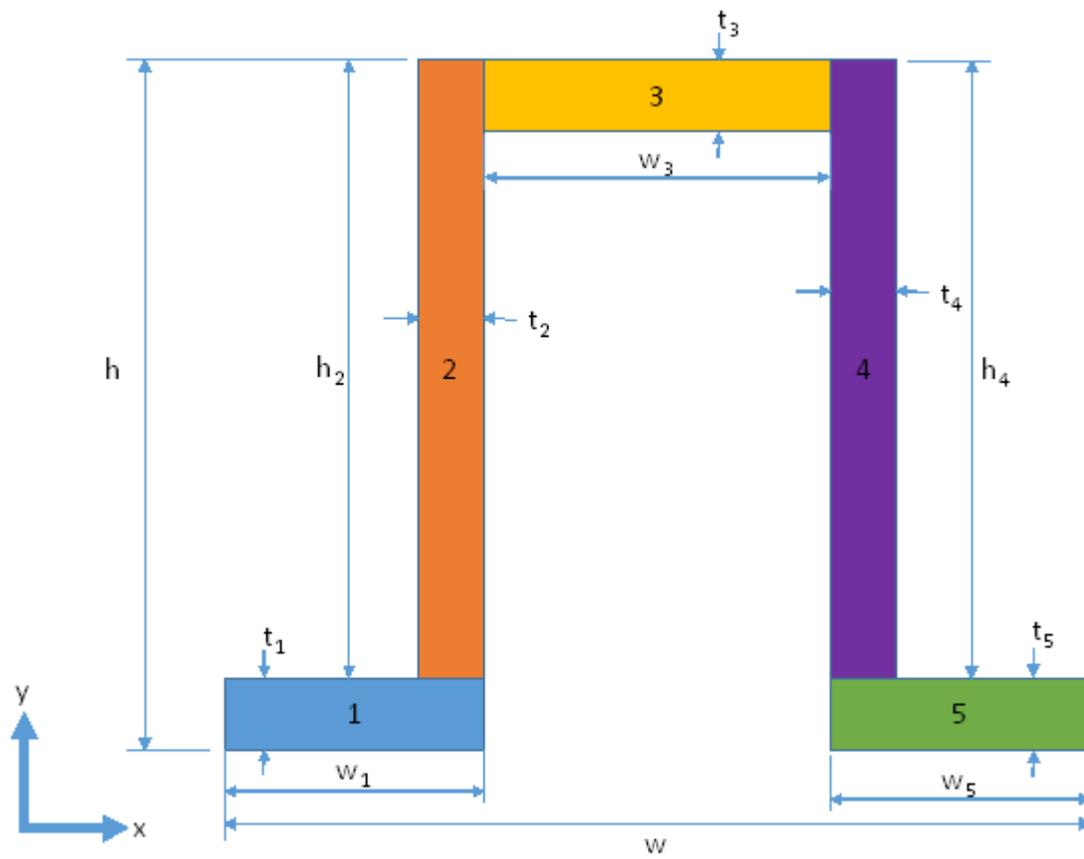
Beam Profile for Sidewall Posts Used in Calculations
